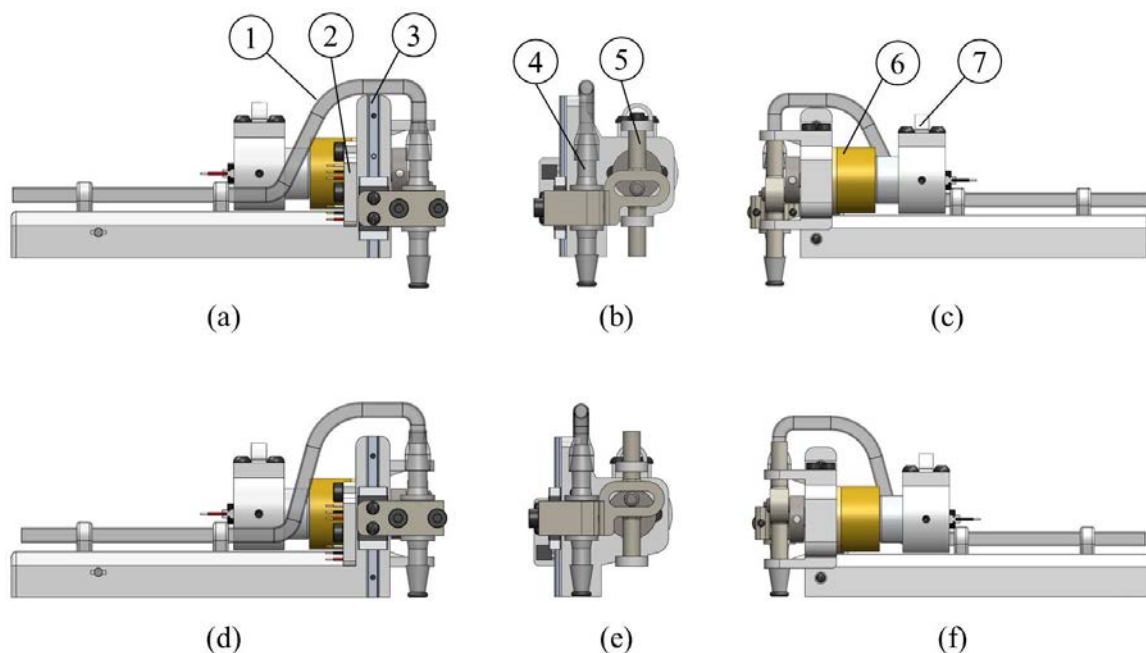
Dispenser design—(a–c) when nozzle is lowered and (d–f) when nozzle is raised. (a) Right view, highlighting the: 1. tube leading from the peristaltic pump to the dispenser nozzle; 2. hall-effect homing sensors used to indicate when the dispenser has reached one of two states: raised or lowered; and 3. the linear rail and corresponding carriage used to guide the vertical motion of the nozzle. (b) Front view, highlighting the: 4. plastic nozzle with an O-ring attached to the bottom to achieve a leak-proof seal; and 5. Scotch-yoke mechanism used to convert rotational motion into linear translation. (c) Left view, highlighting the: 6. DC gearmotor to actuate the Scotch-yoke mechanism; and 7. a strain relief for the sensor and motor wires.
